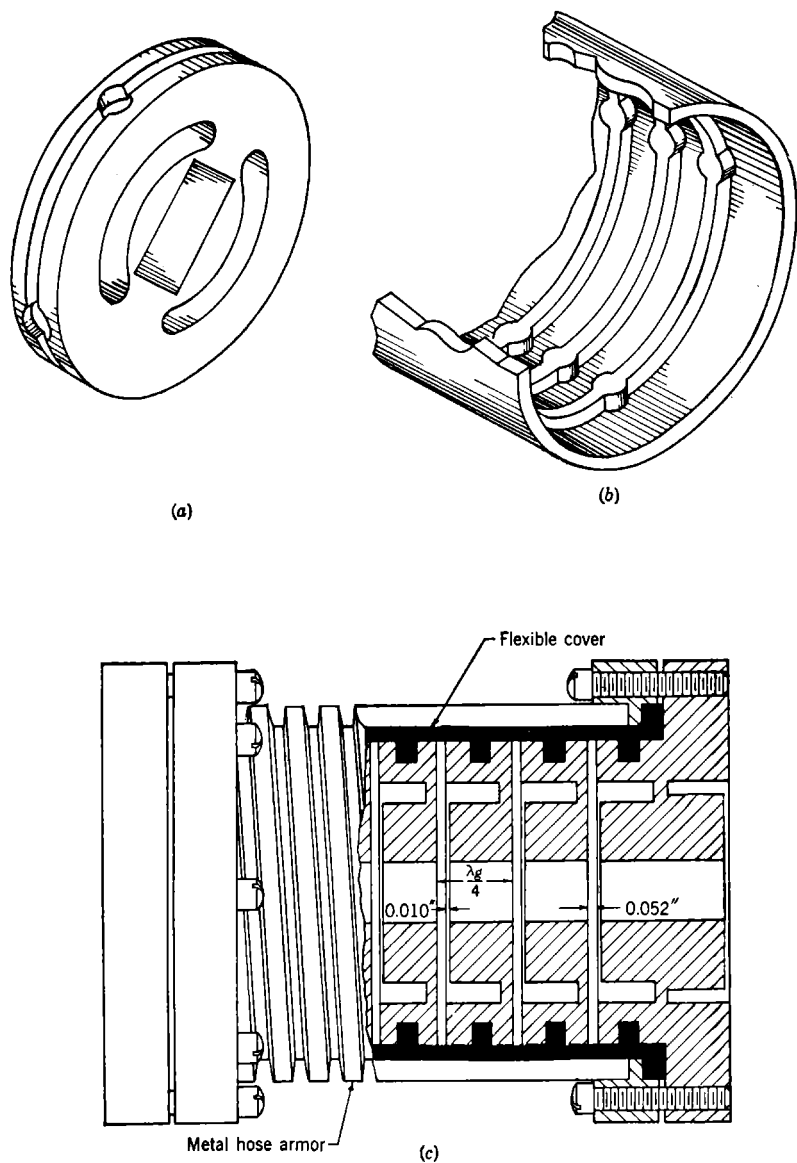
3-cm vertebrae assembly; (a) is a single choke disk, (b) is the flexible cover, (c) parts assembled.
